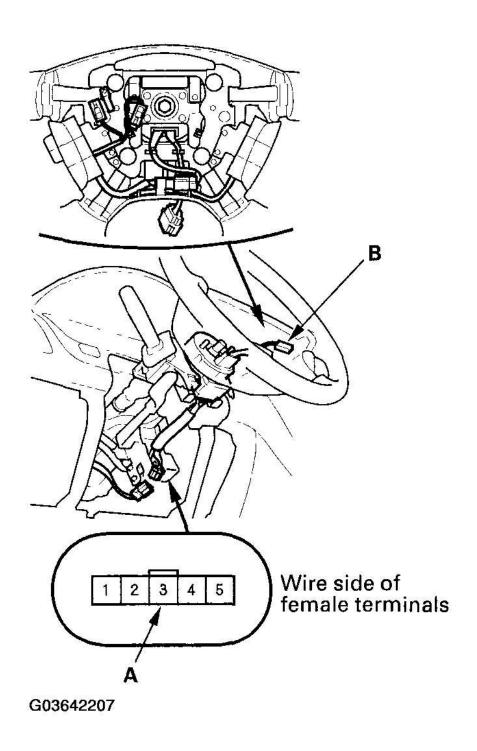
Checking For Continuity Between Cable Reel No. 3 Terminal And Horn Switch Positive Terminal Courtesy of AMERICAN HONDA MOTOR CO., INC.
